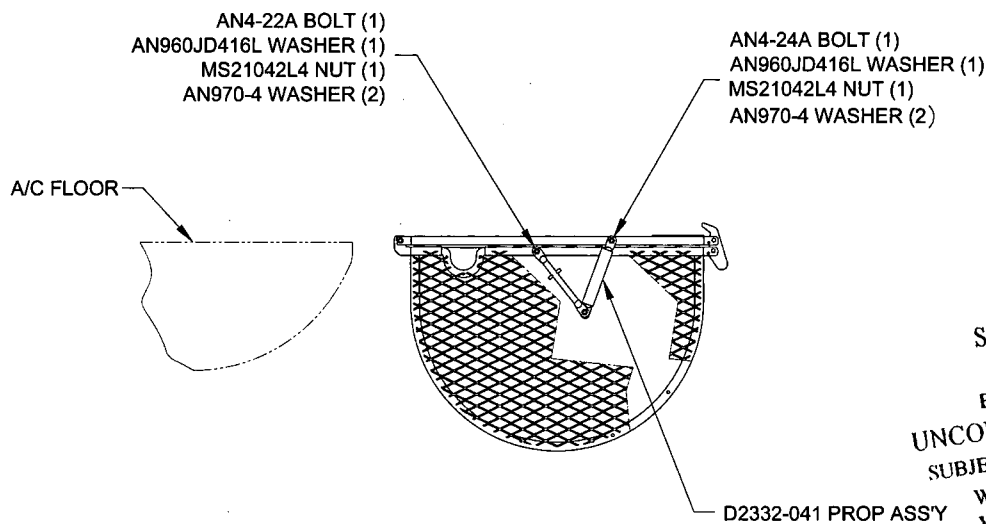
Section C-C Looking Fwd at STA 155.06
